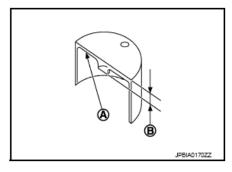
Identifying Thickness Of Valve Lifter And Stamp Mark Courtesy of NISSAN NORTH AMERICA, INC.
